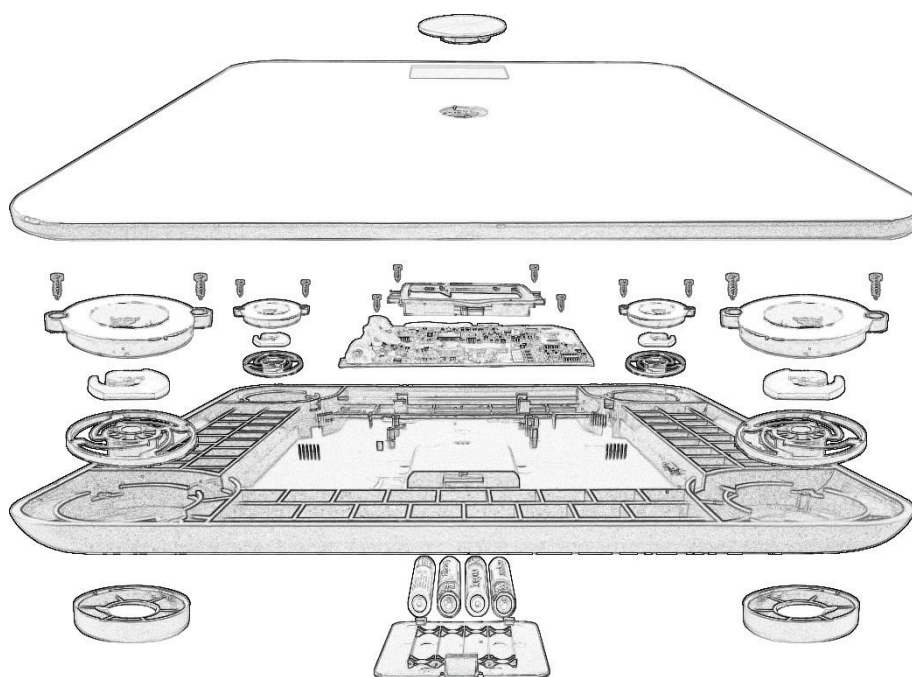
Exploded view of a bathroom scale. The aim of the exploded view is logical to group the components into subassemblies/main components. The main components in this example could be cover, feet/weighing mechanism, display, printed circuit board, batteries, wires, and packaging. Note that the packaging and wires not are included in the drawing for simplicity.
